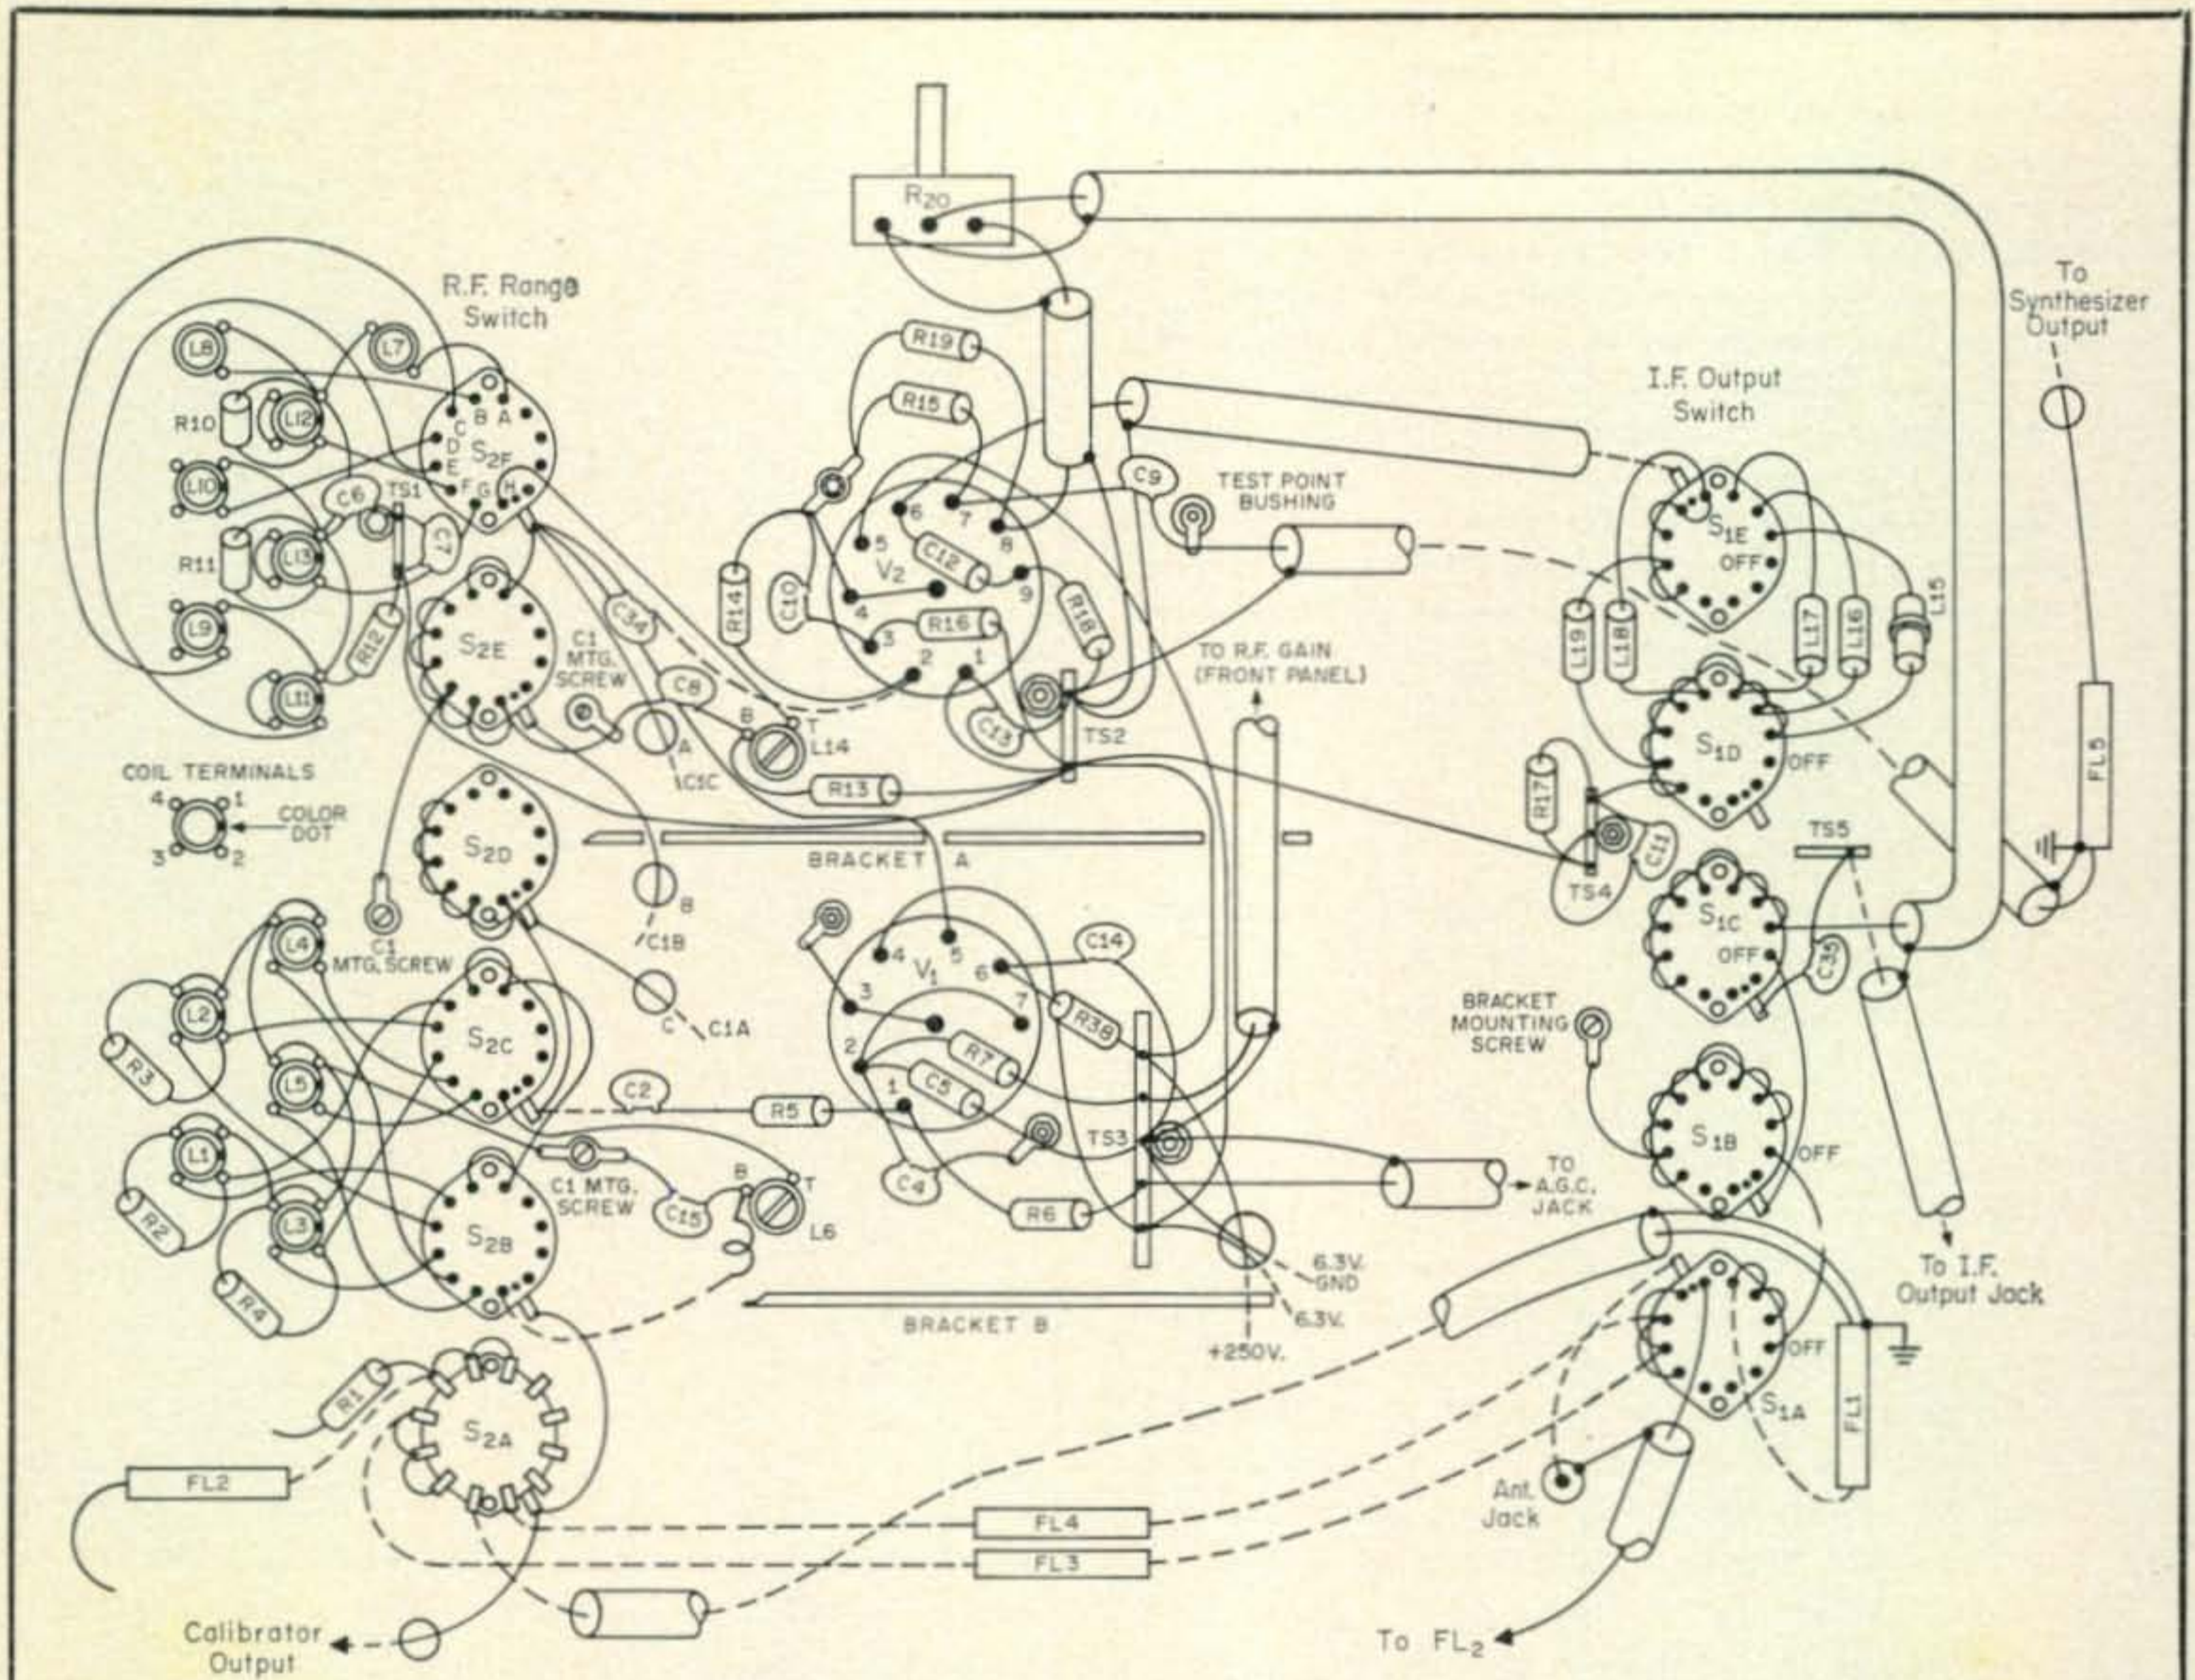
Wiring diagram. See text. The switch sections are shown as viewed from the rear and with the bottom edge of each facing the chassis deck. When assembled, the wiper terminals (the ones shown with a tab) should be oriented as indicated and with the wiper rotors positioned uniformly on the shaft, so all the wipers engage the same relative contact positions. On the i.f. switch, the wipers should engage all the off-contacts at the same time. Connect all grounds at the indicated points. Leads shown in dashed lines should be connected after the switches are installed. The shielded lead from  $TS_3$  goes to the r.f. gain through hole D on the front of the chassis.  $TS_5$  mounts on bracket D as in fig. 4. The free end of  $R_1$  should be connected to a solder lug at the hole above  $S_{2A}$  on bracket B. The antenna, i.f. out and a.g.c. jacks mount on the rear of the chassis. Bypass the a.g.c. lead at the jack with .01 mf. On  $L_6$  &  $L_{14}$  T indicates top terminal; B, bottom. The coil drawn next to  $L_6$  is a two-turn link wound at the bottom of  $L_6$ .  $FL_2$  mounts inside the rear of the chassis (behind  $S_{2A}$ ). Bracket C may be installed after the work is completed.
